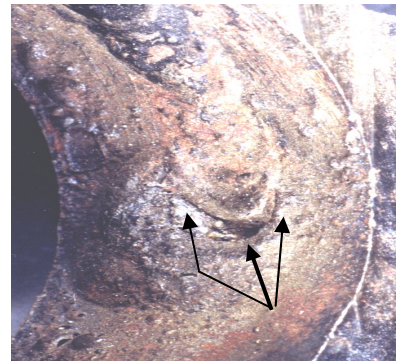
Lack of adhesion at the end of weld(Ø38, thick-3mm)
